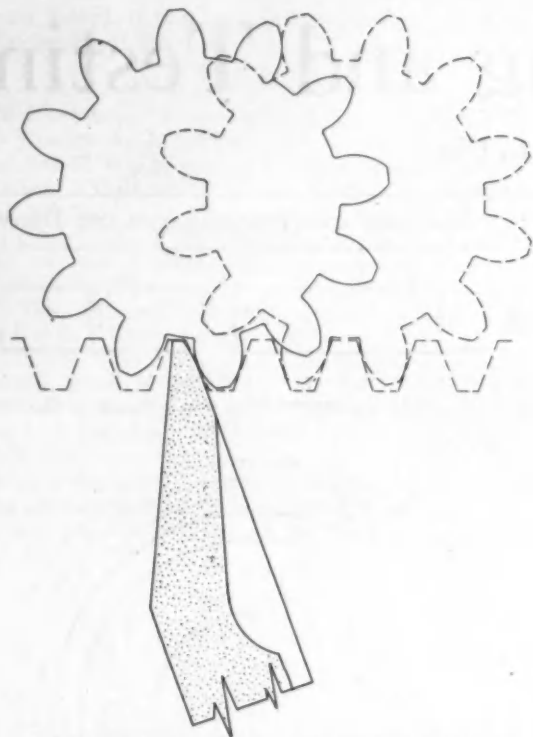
APPLICATION OF THE GENERATING PRINCIPLE TO GEAR GRINDING, THE GRINDING WHEEL BEING THE EQUIVALENT OF ONE SIDE OF A RACK TOOTH
